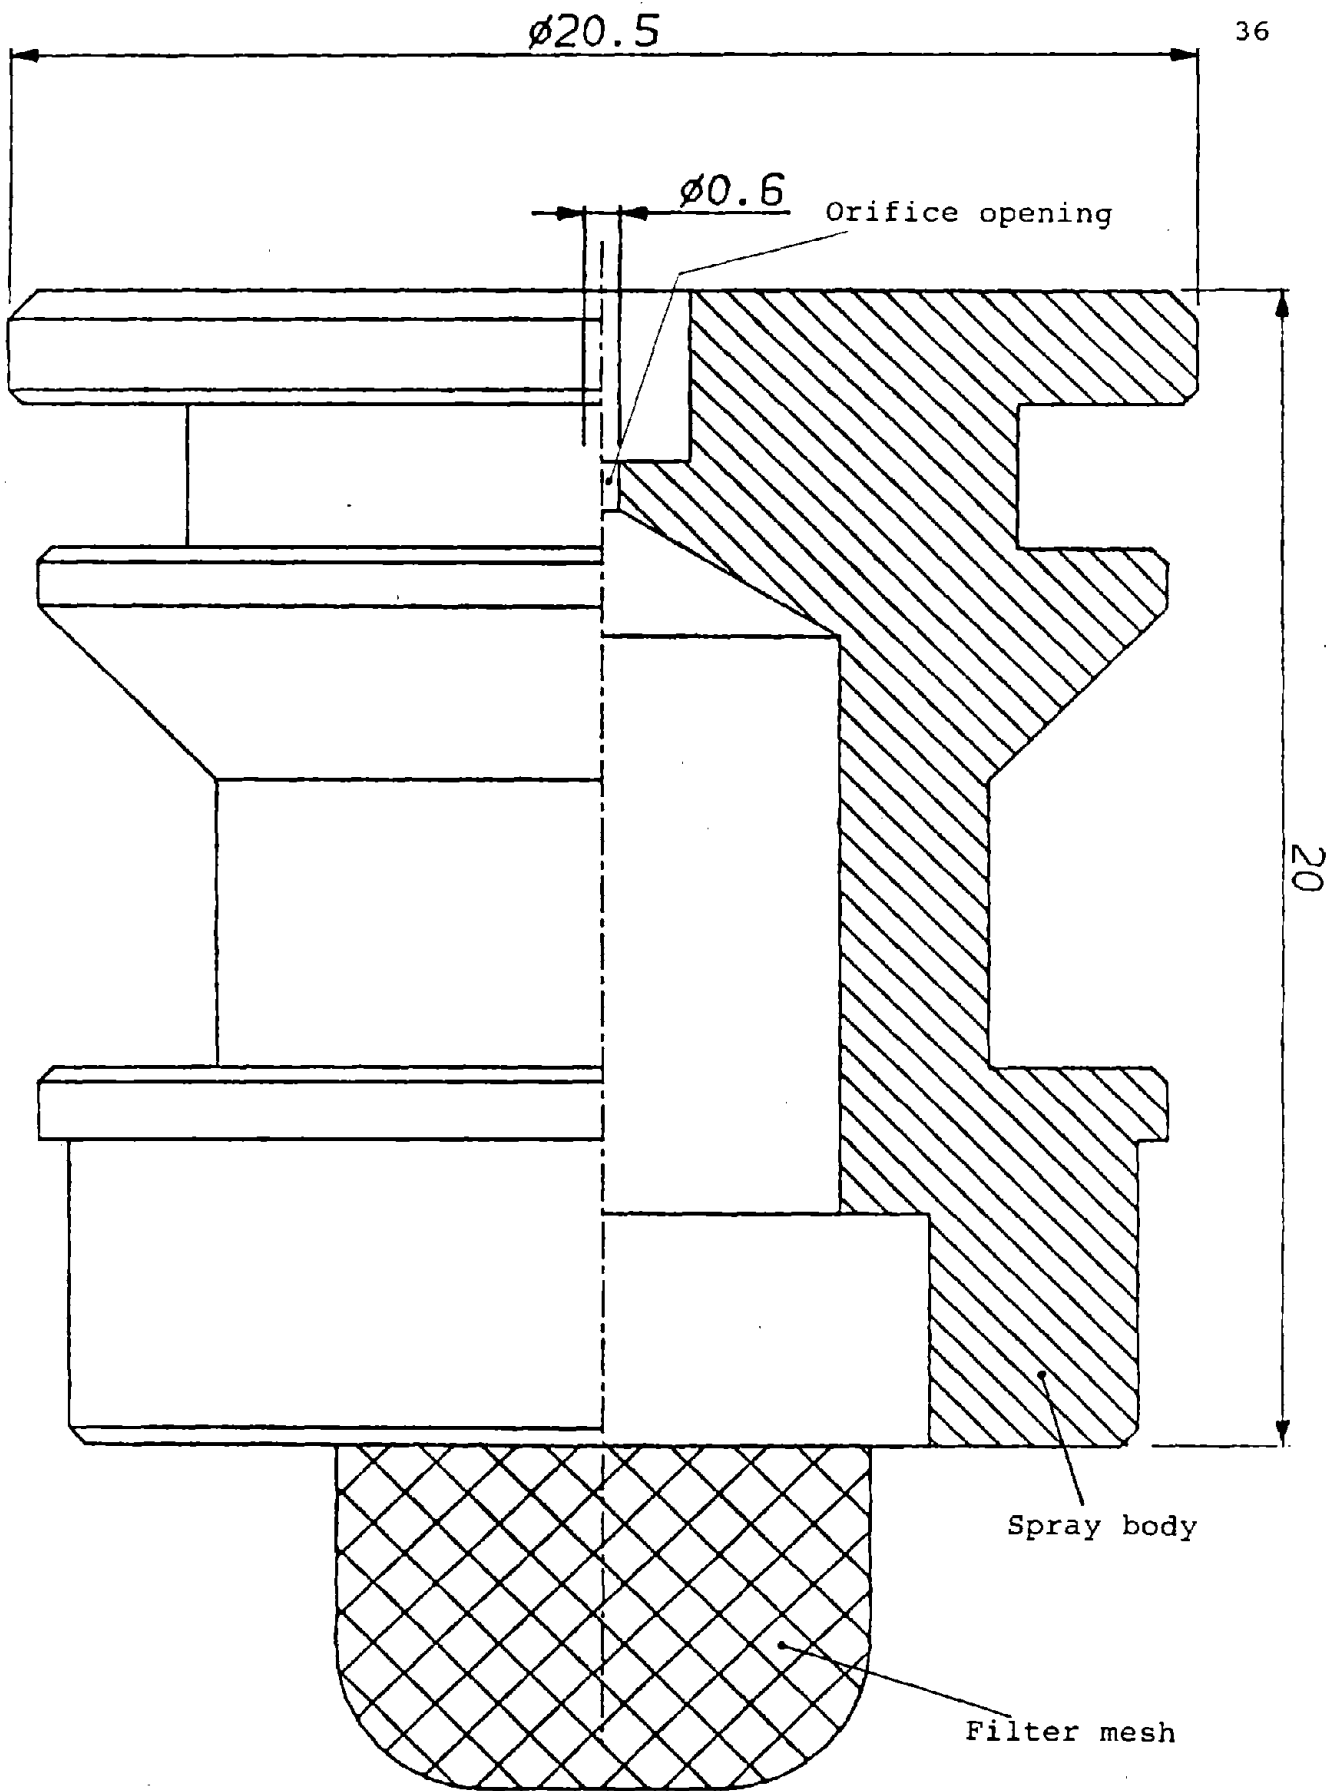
Nozzle used during high-pressure water tests, cut-away view (all measurements are in mm)
